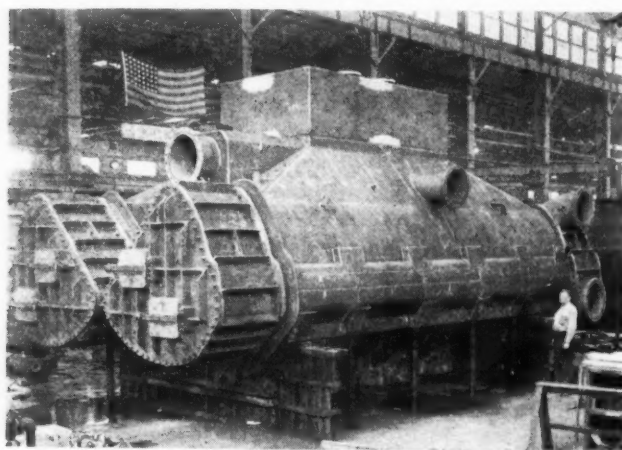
The condenser is of welded plate construction and in two halves
